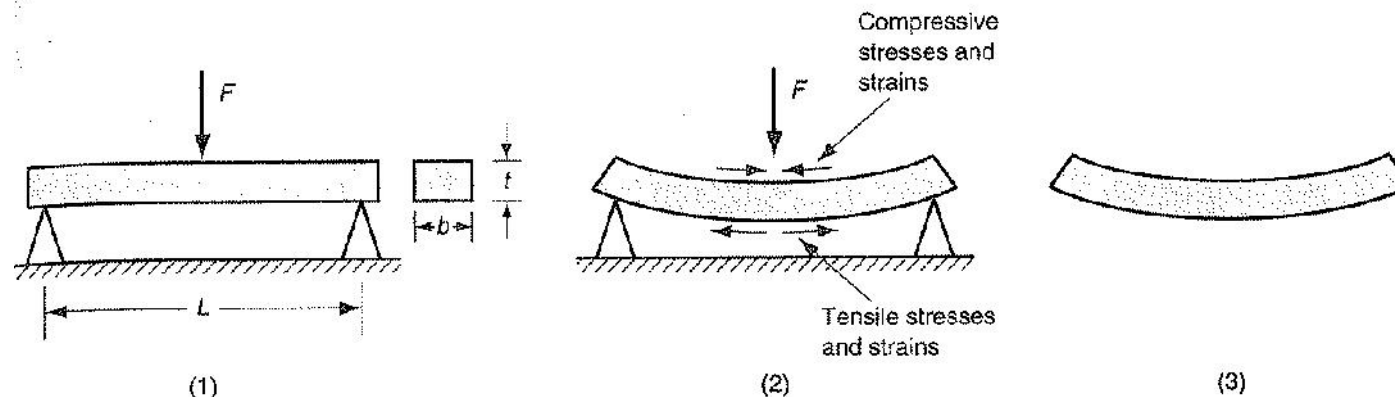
Bending test setup and specimen: (1) initial loading, (2) highly stressed and strained specimen, and (3) bent part.
